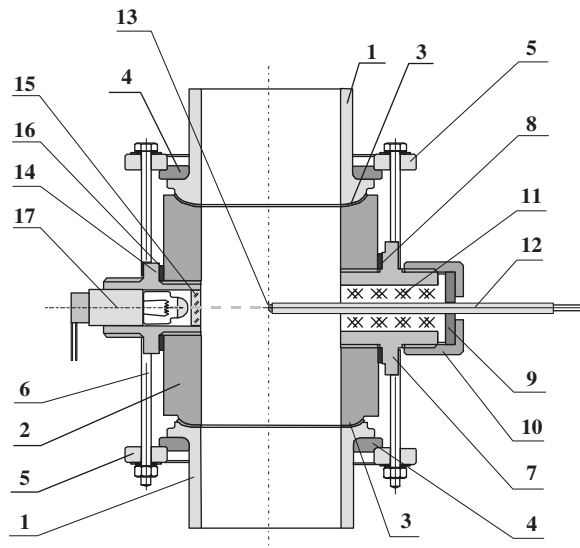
Construction of optoelectronic sensor: 1—glass sections of the measuring pipeline, 2—ring to install measuring devices, 3—rubber gasket, 4—half-ring clamps, 5—flanges, 6—clamping screws, 7—longer connector pipe, 8—packing washer, 9—throttle, 10—screw cup, 11—teflon pad, 12—phototransistor holder (stainless steel pipe), 13—phototransistor BPYP 21, 14—shorter connector pipe, 15—polymethyl methacrylate window, 16—packing washer, 17—lamp holder.
